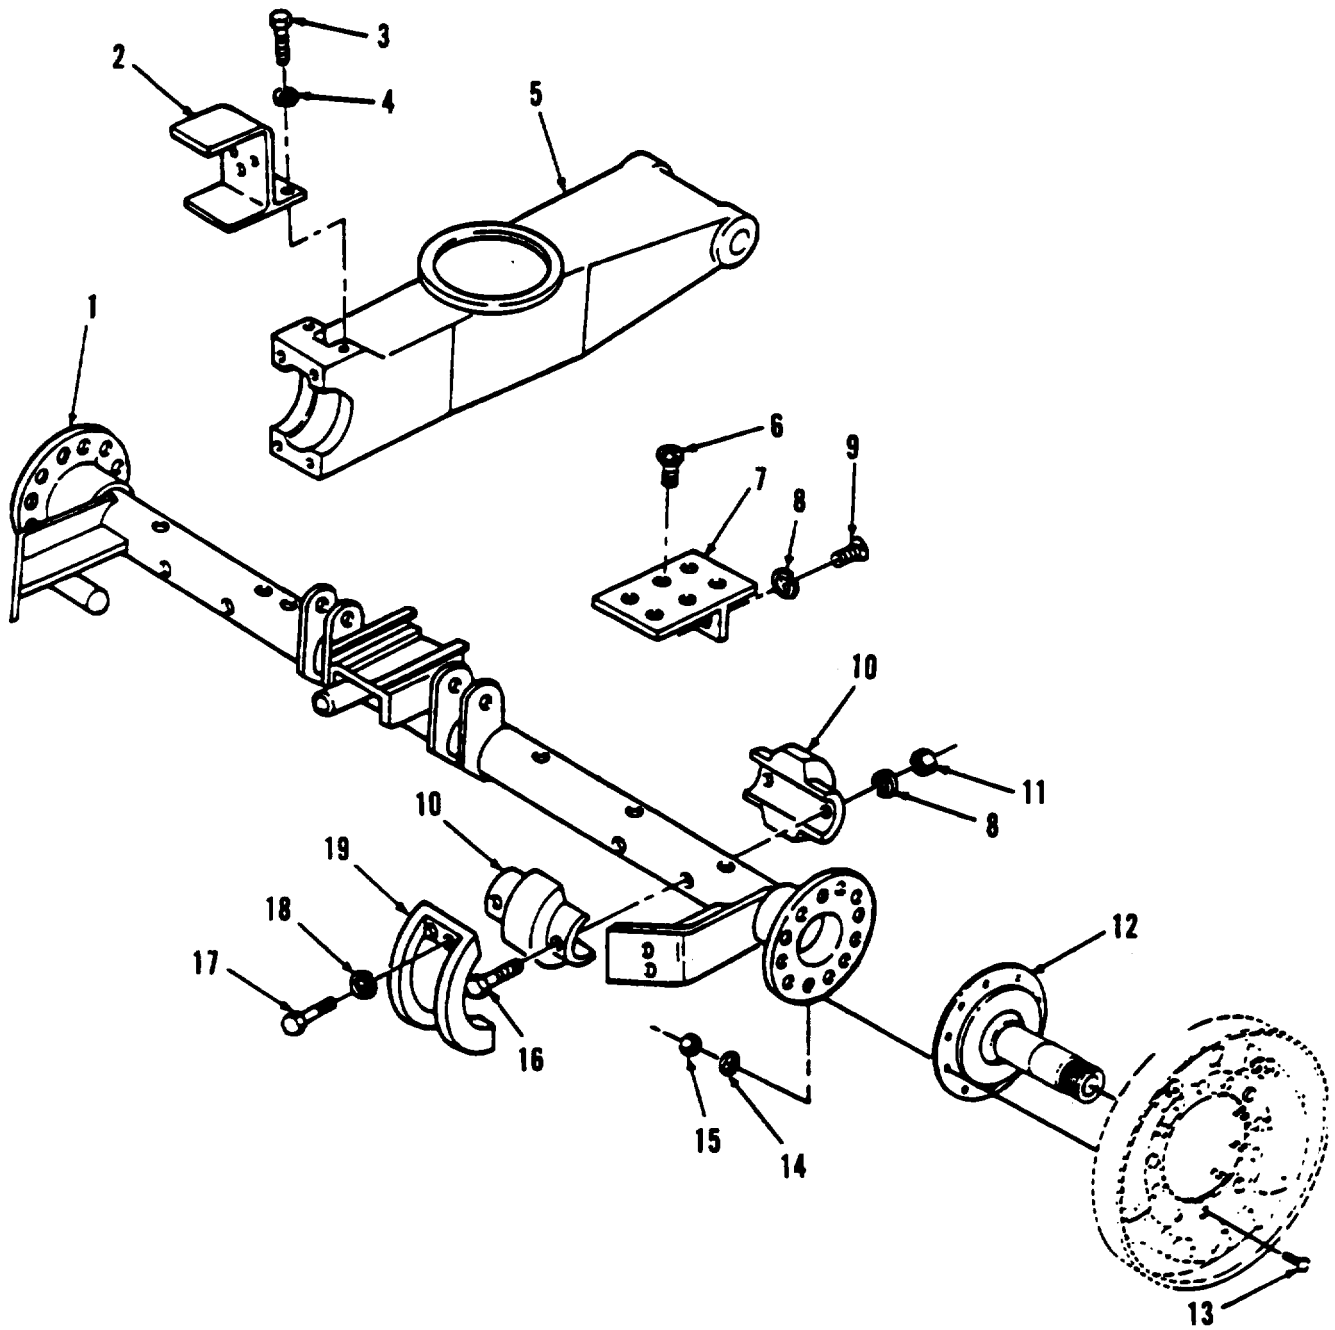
REAR AXLE ASSEMBLY (M840).
